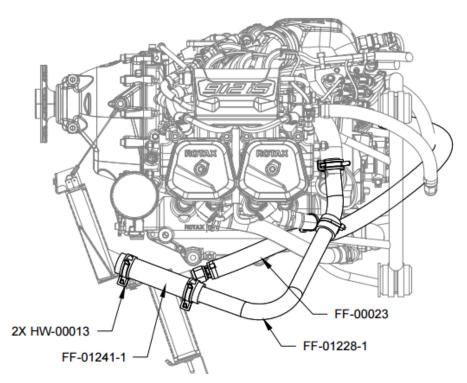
Radiator and Oil Cooler Tube and Hose Install – Left Side
